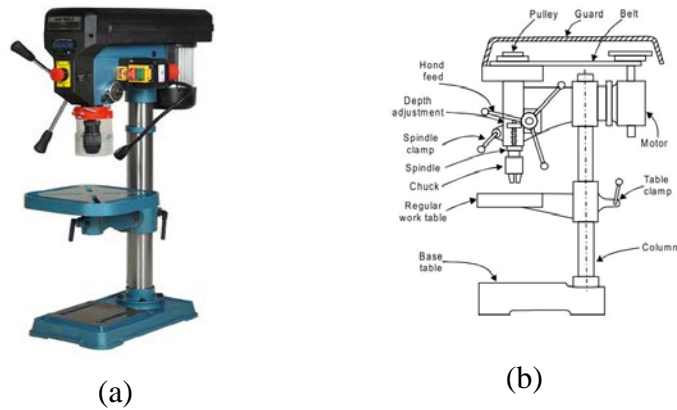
Drilling Machine (a) and the construction of drilling machine (b)
